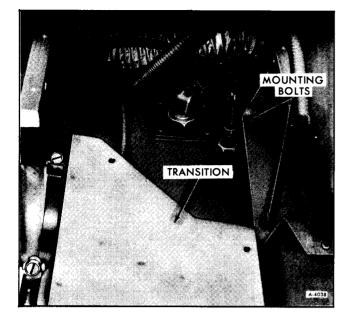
Location Furnace Mounting Bolts (Left-Side)
